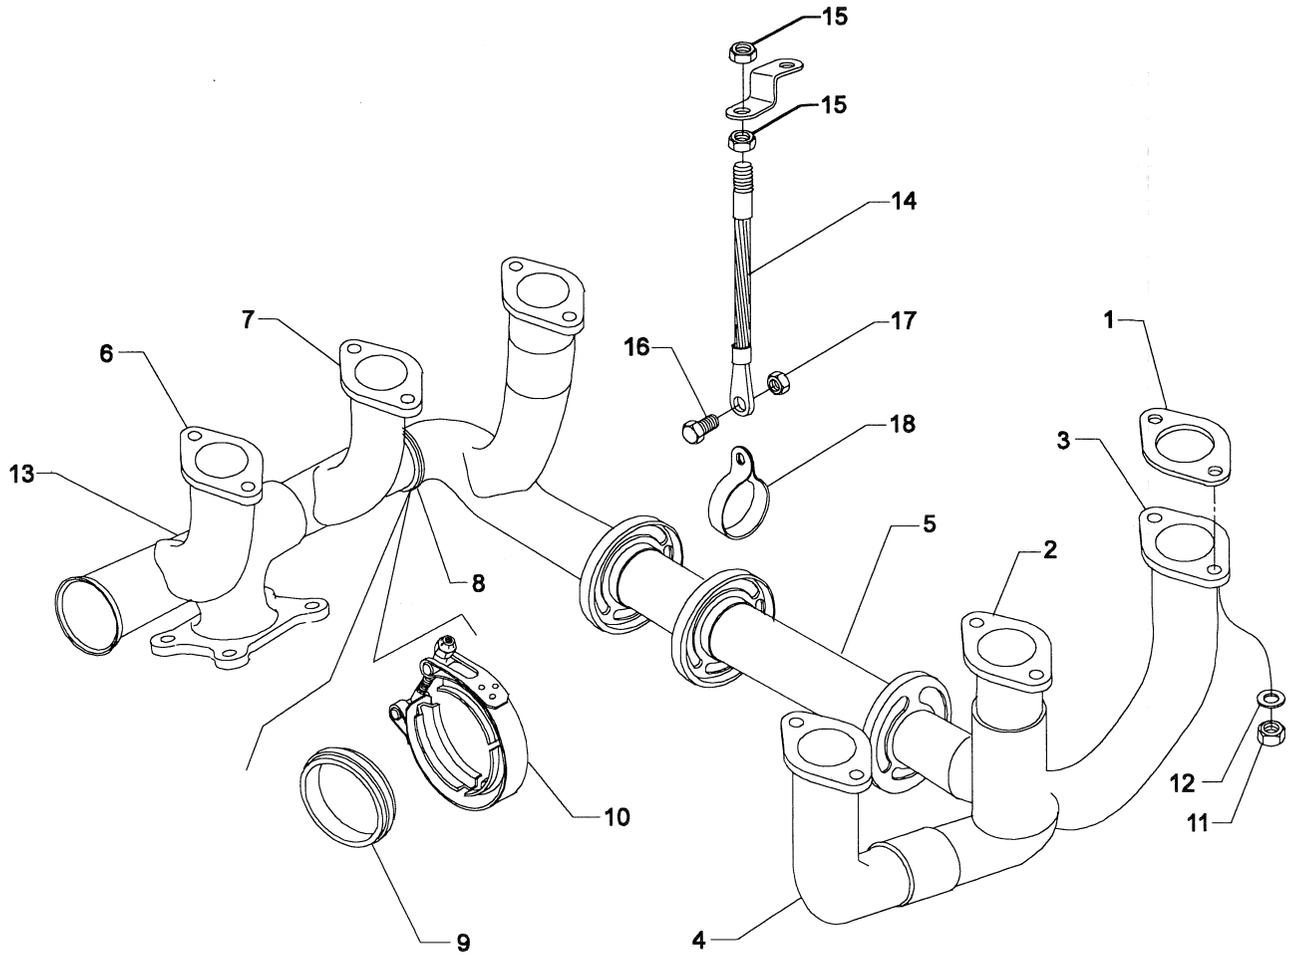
EXHAUST PIPES AND TRANSITION ASSEMBLY
